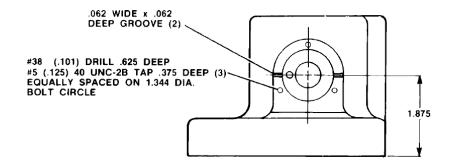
Dimensions for Machining 12 ft-lb Servo Cylinder for Weatherproof Boot
